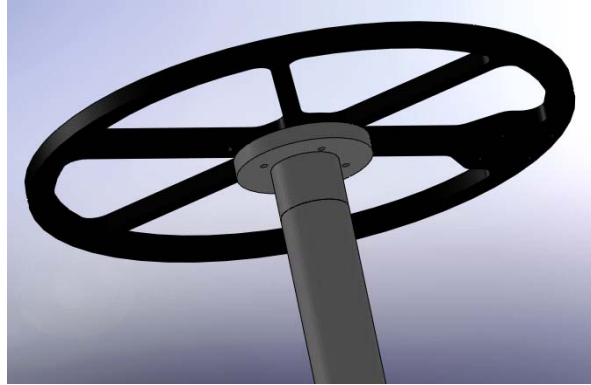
Hub Adds Support to Wheel and Keeps it True to Shaft
